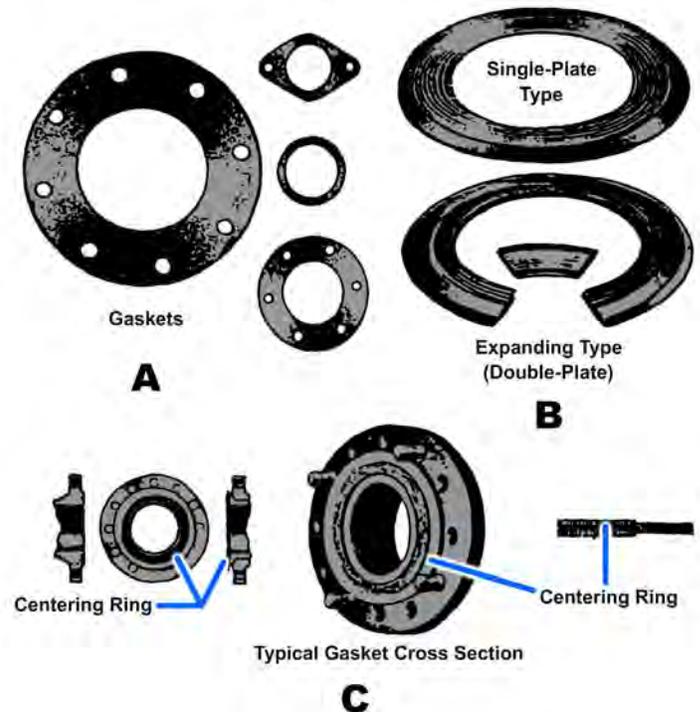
Fixed joint gasket. A. Sheet asbestos gasket. B. Serrated-face metal gasket. C. Spiral-wound metallic asbestos gasket.
